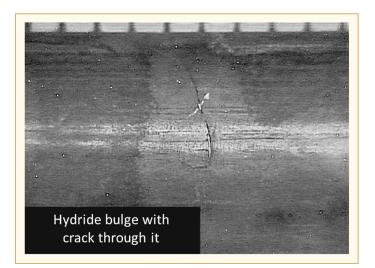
A cladding hydride bulge with crack through it.
